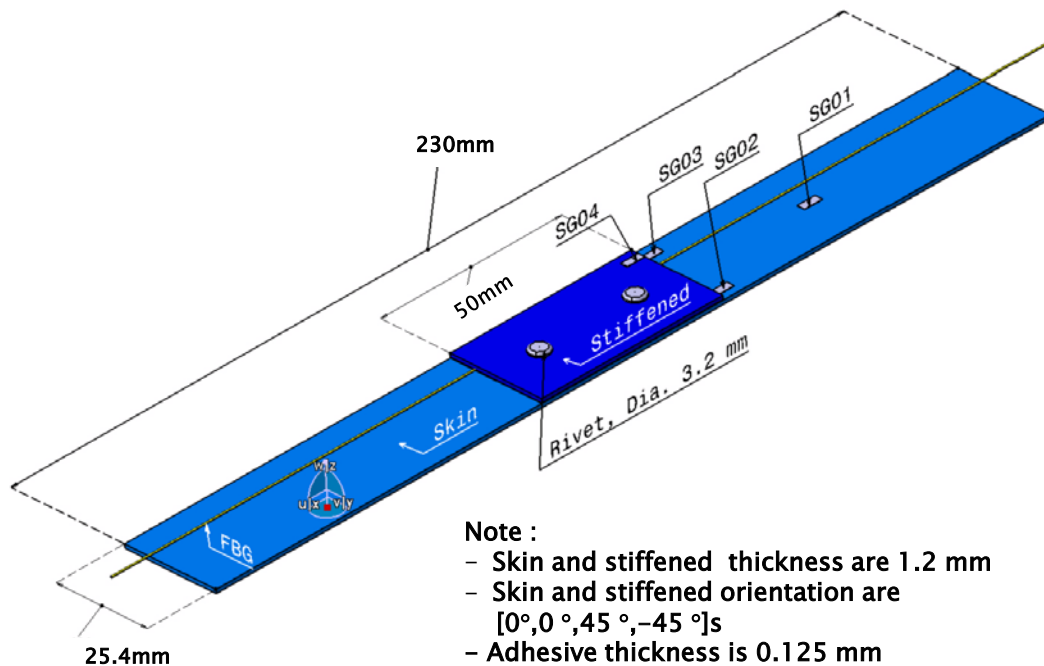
Specimen dimensions and configuration with FBG sensor installed inside.
